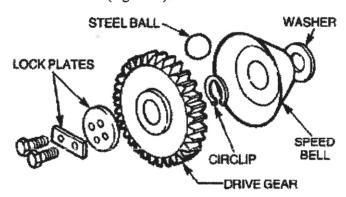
Governor Drive Gear and Speed Bell - Exploded View
